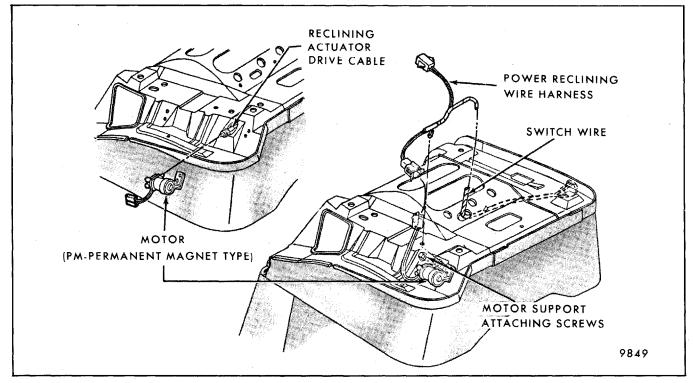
B and C Style Power-Operated Reclining Seat Back Motor, Drive Cable, Relay and Wire Harness - 45-55 Seats
